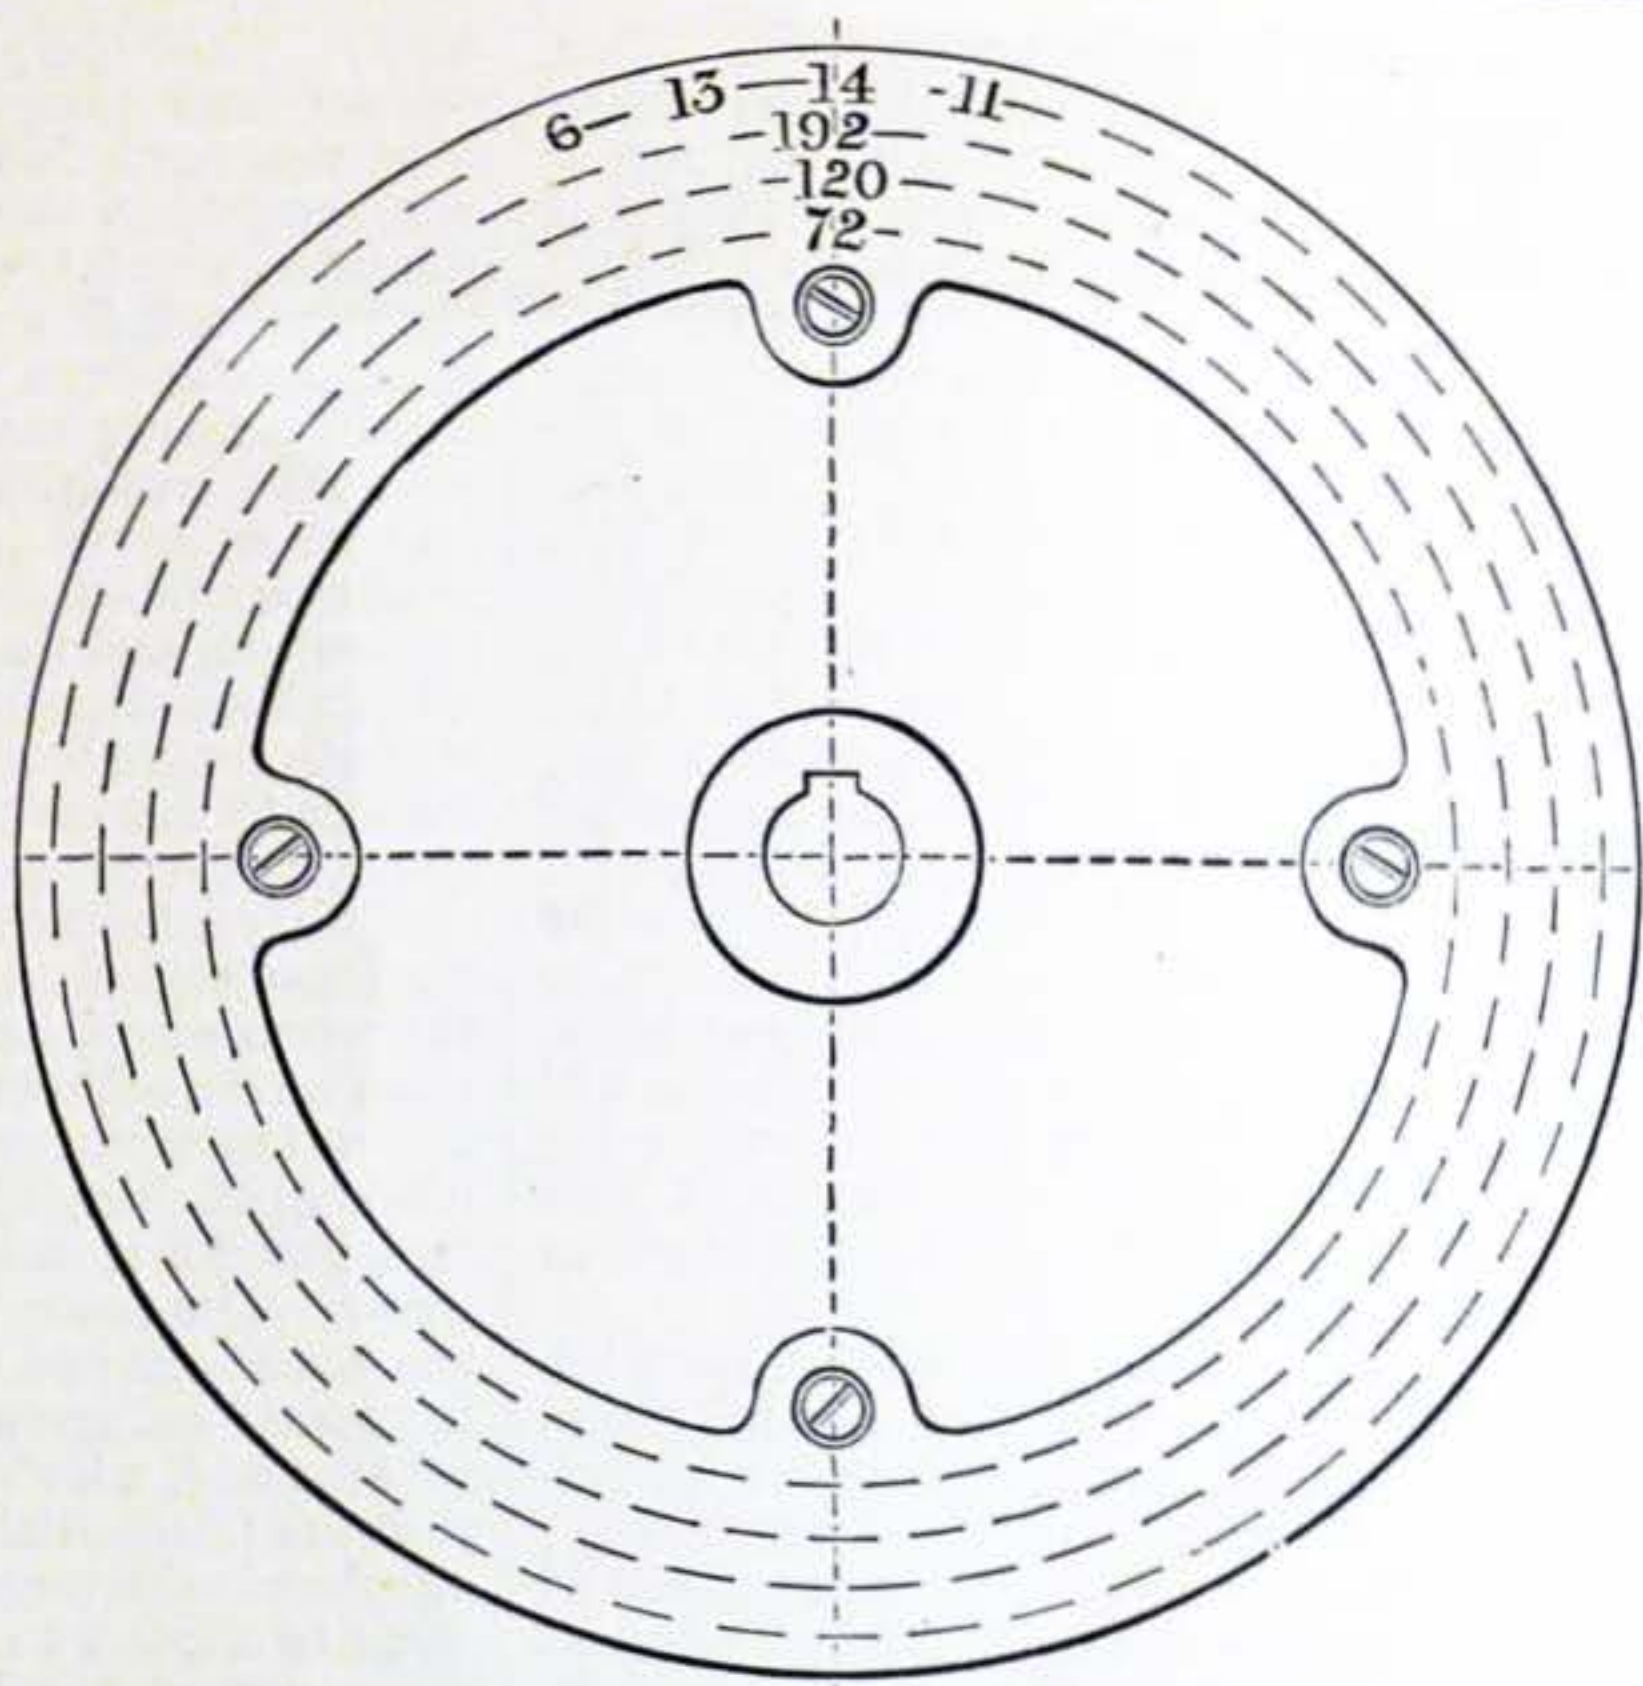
Worm Wheel and Gear Wheel: Front View. Fig. 27.—Ditto: Section.
